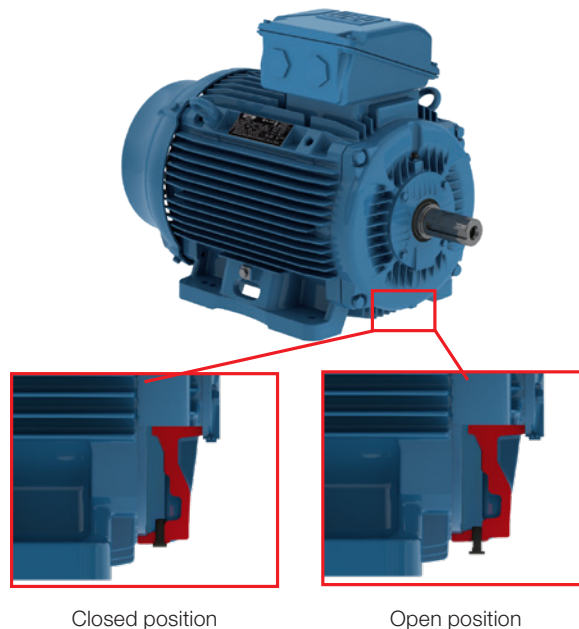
Detail of the rubber drain plug mounted in closed and open position
